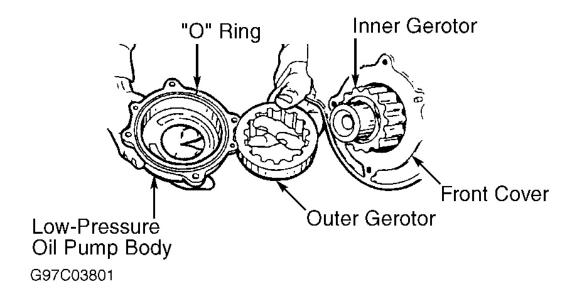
Locating Low-Pressure Oil Pump Components Courtesy of FORD MOTOR CO.
